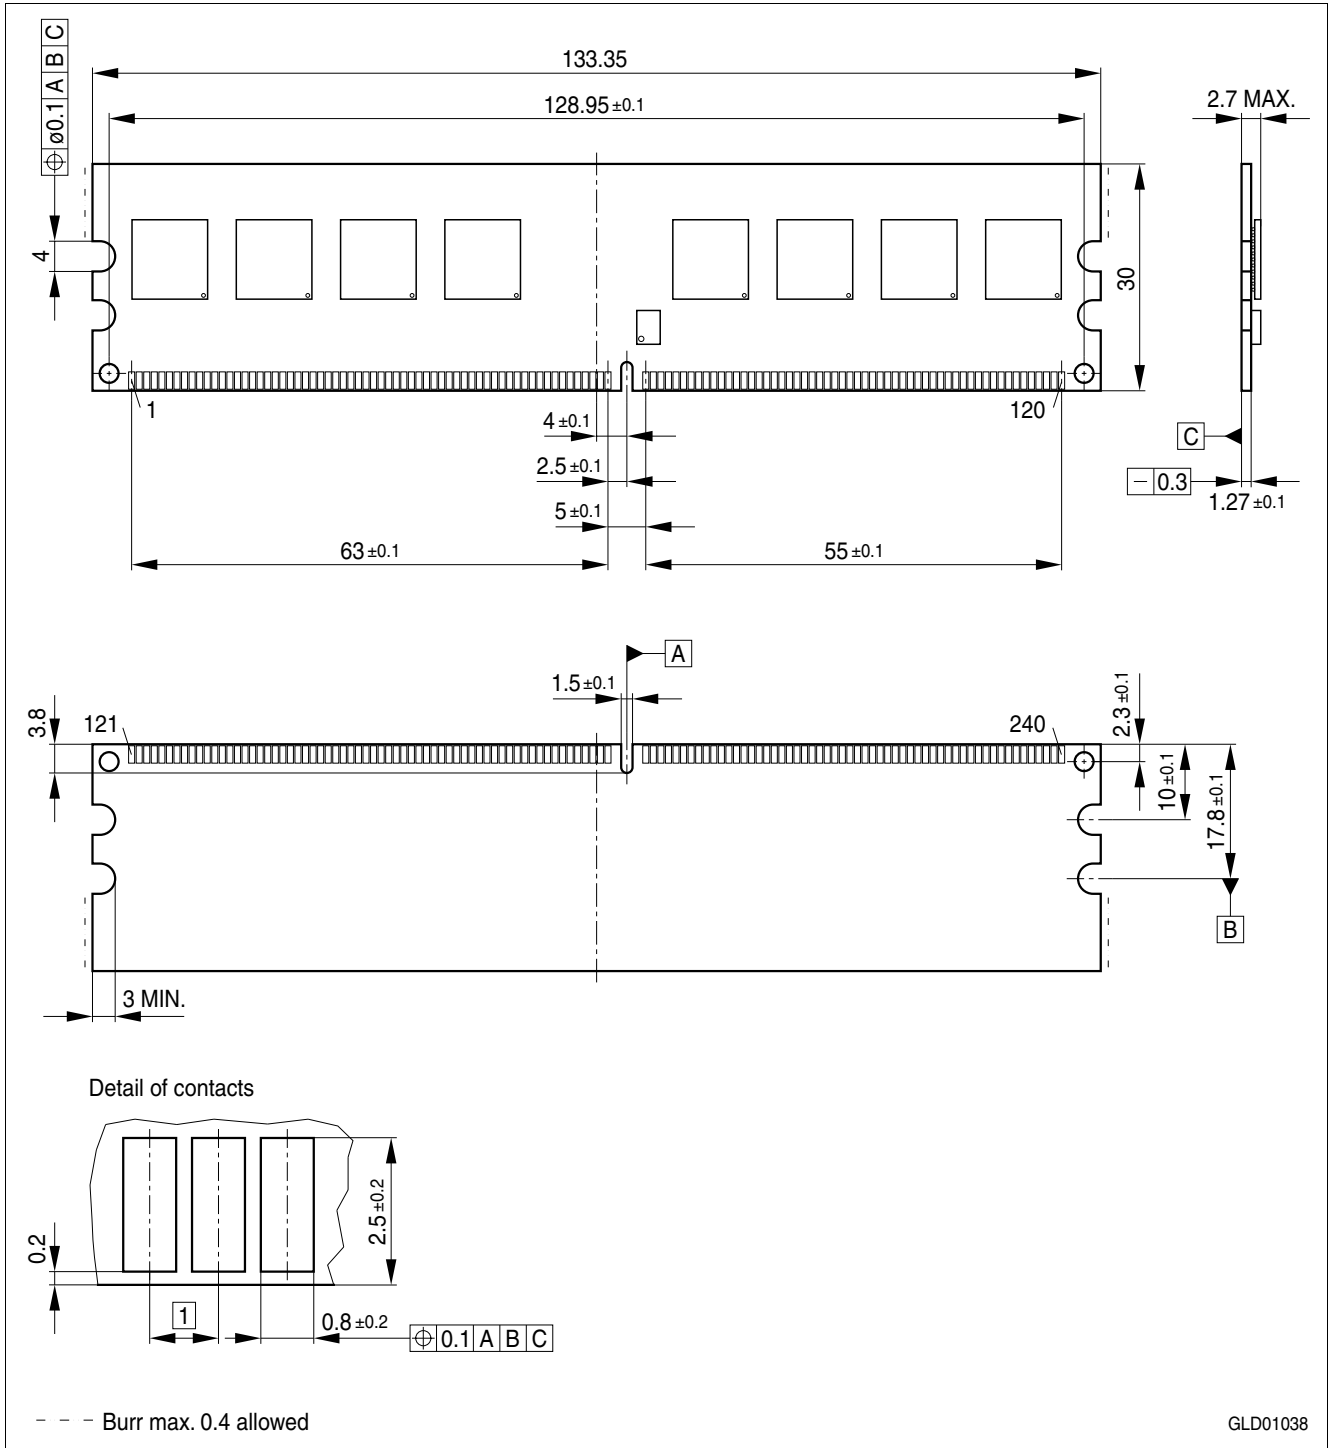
Package Outline Raw Card C – L-DIM-240-3
